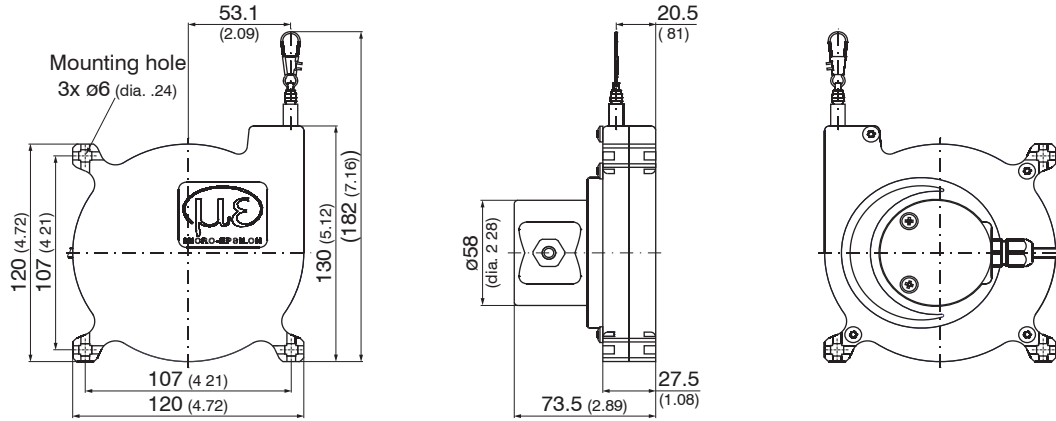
Dimensional drawing WPS-...-MK120-CR, measuring ranges 3000 and 5000 mm, dimensions in mm (inches), not to scale
